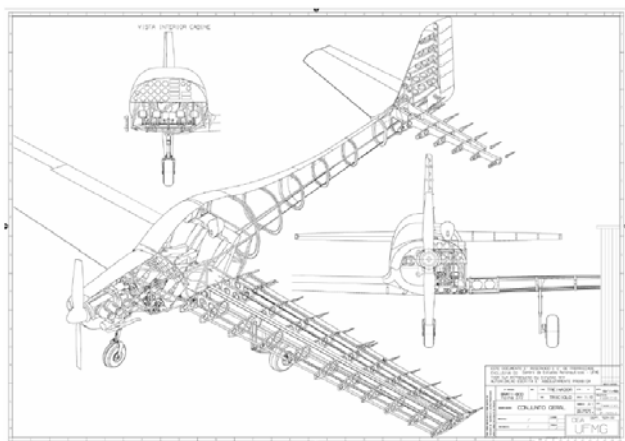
Three-dimensional detailed drawing of aircraft Brati
